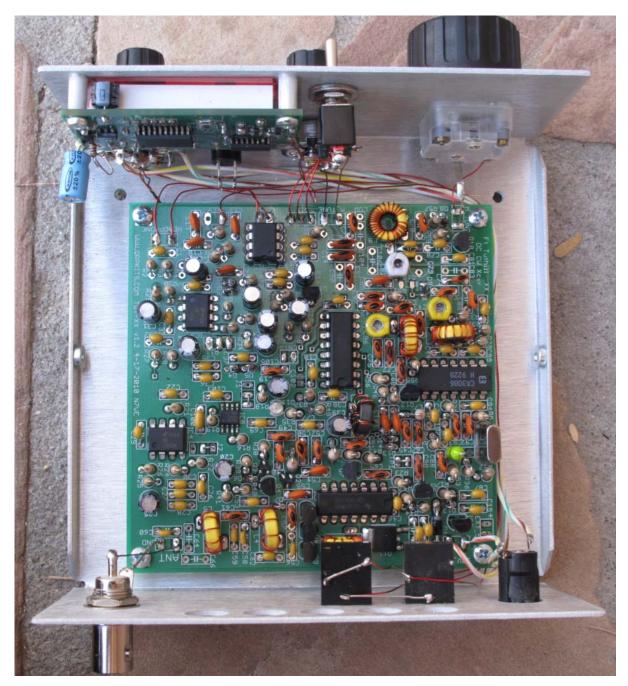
Board in case. All front to back wires routed along the CA3086 edge of the board
